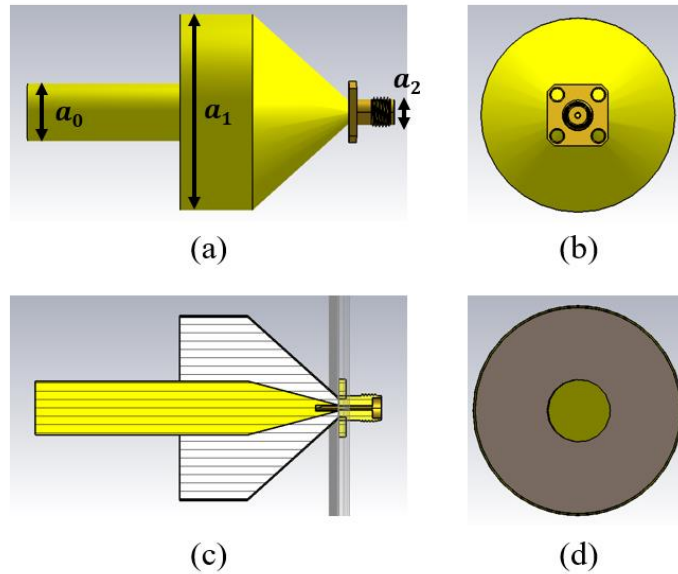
CAD model of the customized coaxial connector showing the (a) side, (b) back, (c) dissected and (d) front views.
